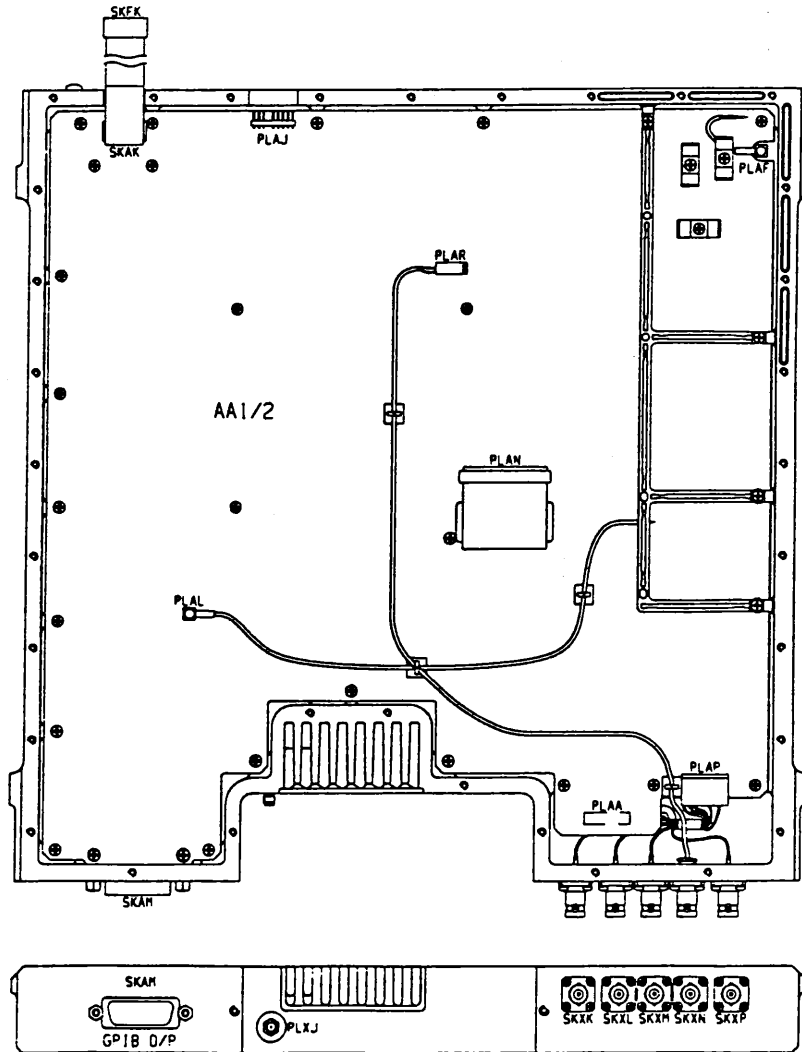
RF tray from above and rear with tray cover removed showing board and locations of connectors
